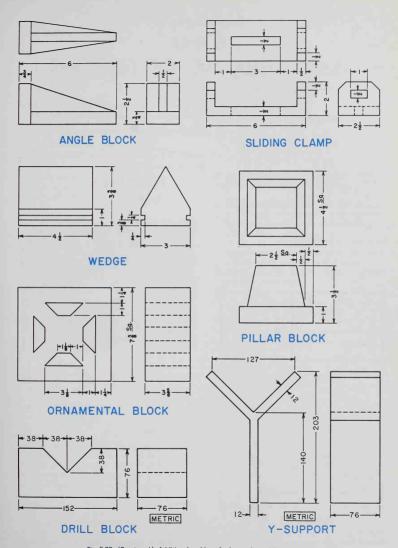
(Continued.) Additional problems for isometric or oblique drawing.
